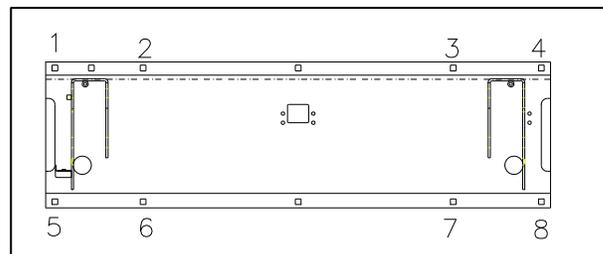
· BUS CLAMPING BAR ARRANGEMENT
